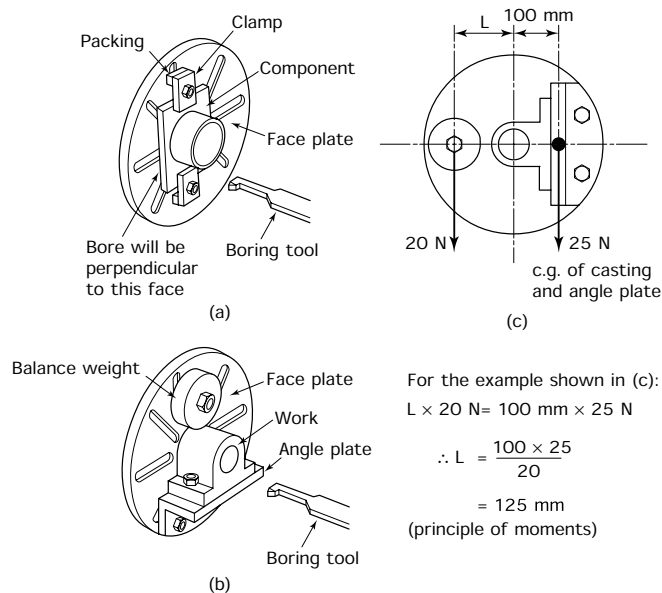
The faceplate: (a) balanced work; (b) unbalanced work; (c) positioning the balance weight
